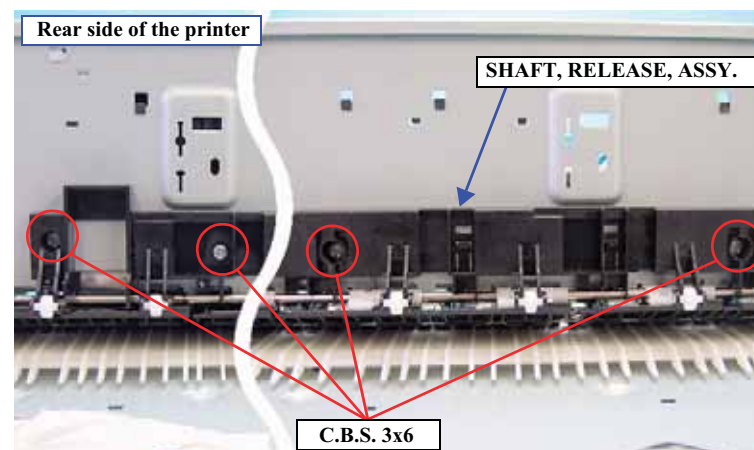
Removing the screws from the SHAFT, RELEASE, ASSY.
